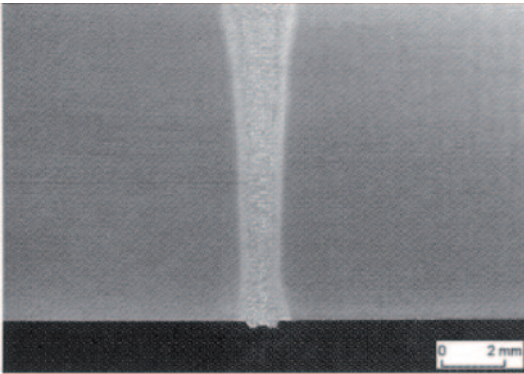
Laser weld, single pass, butt joint pipeline steel X70, $t = 12$ mm, laser power 10.2 kW, Welding speed 2.2 m/min
